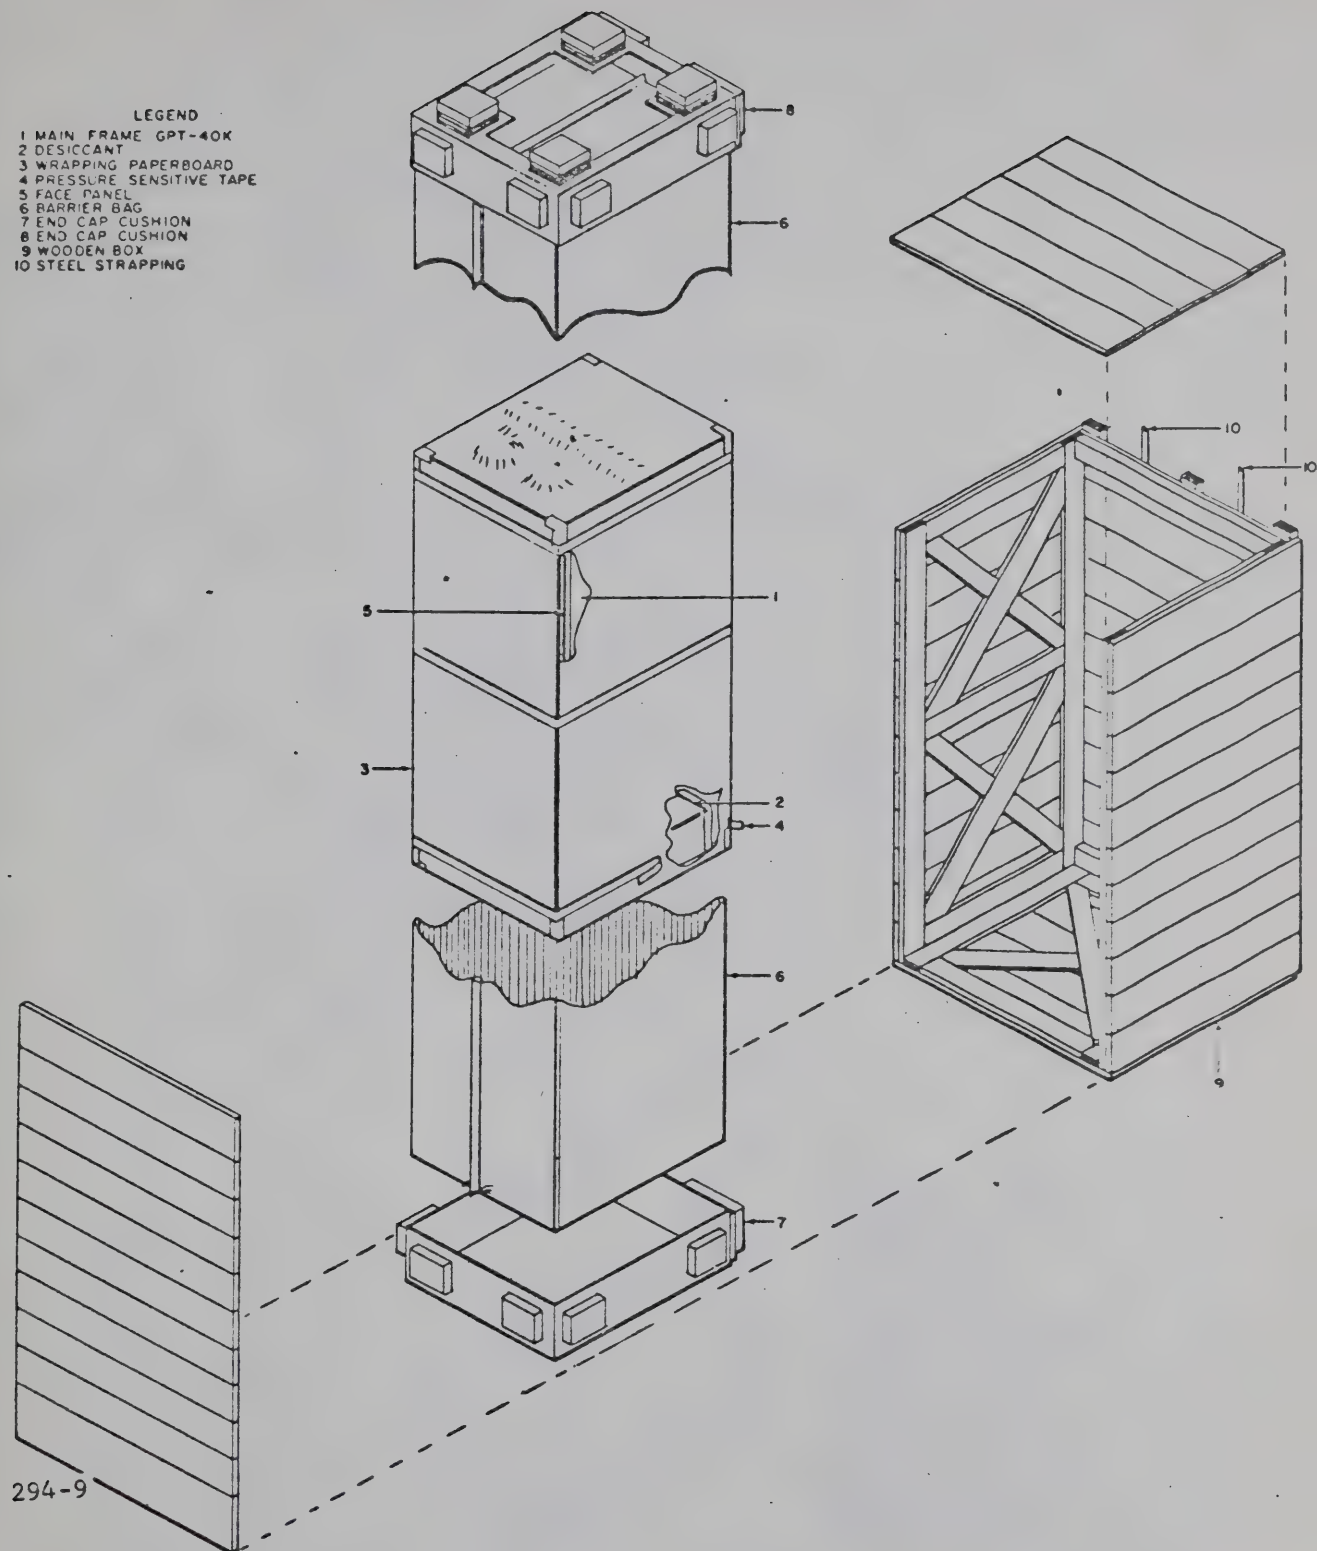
Typical Equipment Packaging (sheet 1 of 3).
